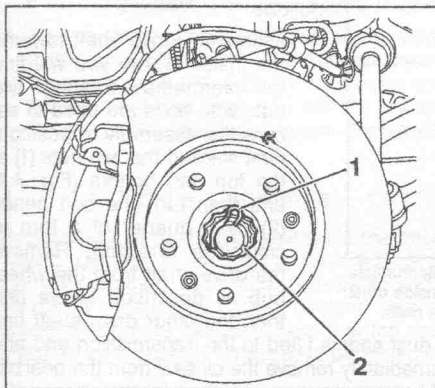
The securing pin (1) and the nut lock (2) must be removed before the drive shaft nut can be slackened.
